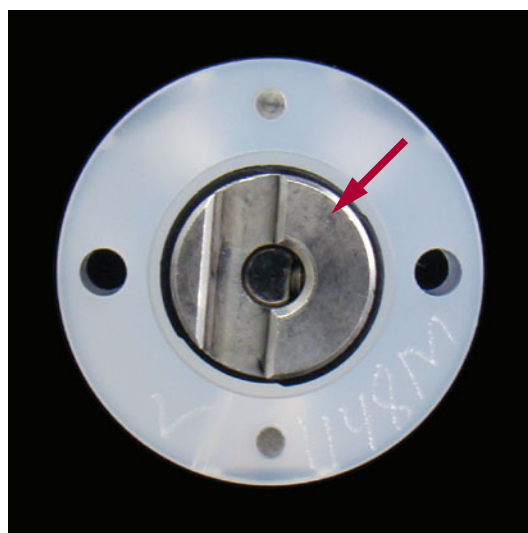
Twist the back of the XP valve to line up with the position of the XP valve removed.
